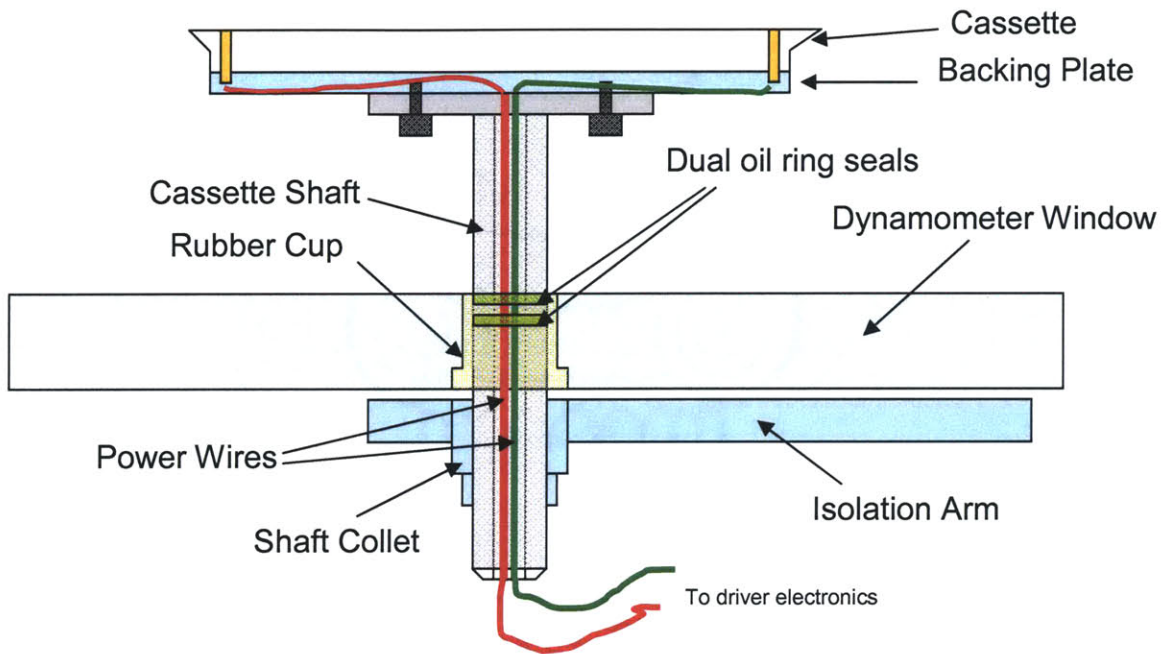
Diagram of major components in the dynamometer shaft seal system
